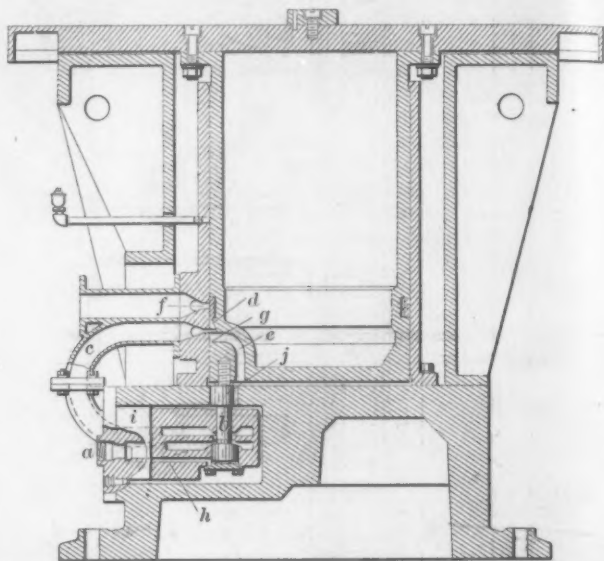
Details of a New Valve for Jolt Ramming Molding Machines
